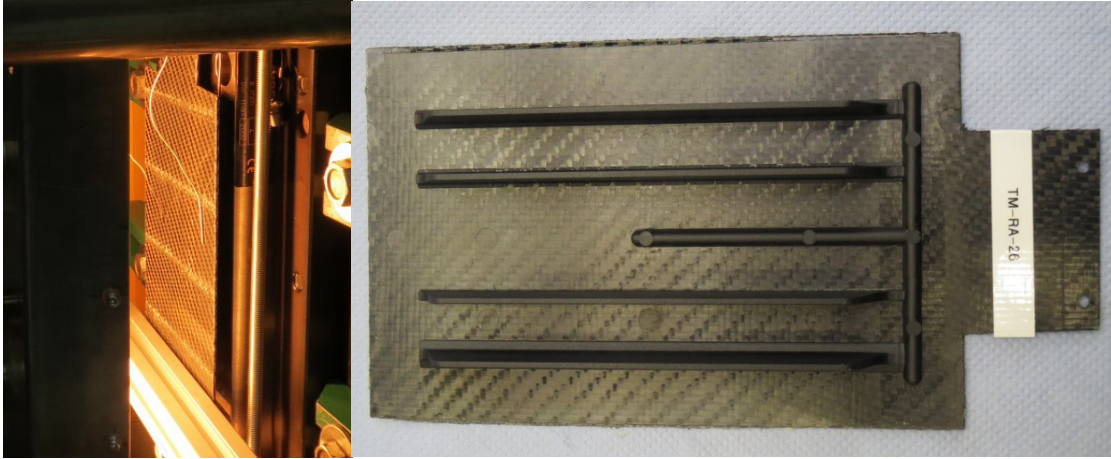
Heating of the organic sheet inside the mould (left); the organic sheet with the injection-moulded ribs (right)
